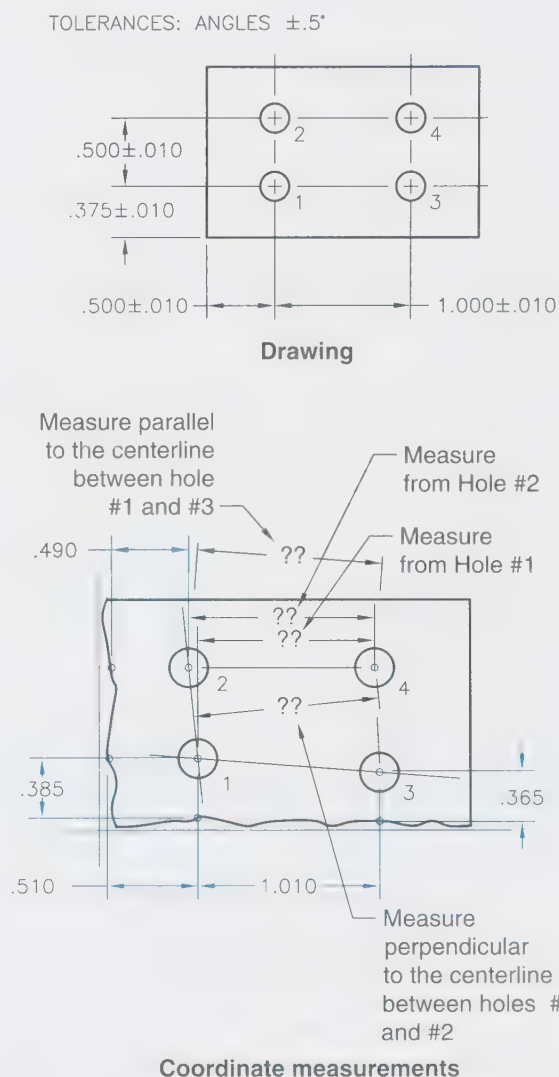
Coordinate location tolerances are ambiguous. The origin and direction for measurements are not defined. All measurements taken must be done on the basis of assumptions because no standard defines the coordinate tolerancing system.
